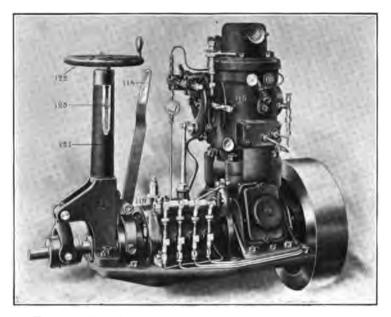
Bolinder Engine, with Reversible Blade Propeller.
